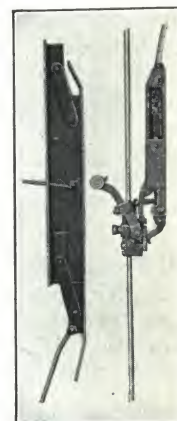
Retiring Cam on Car; Friction Block on Door; Lock on Door Guide
